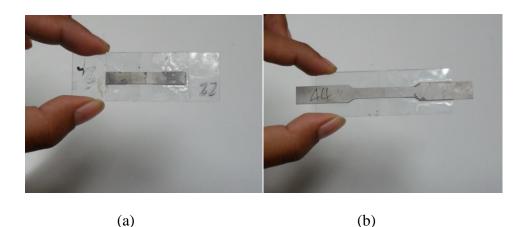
Mount specimen (a) weld profile specimen (b) tensile specimen.
